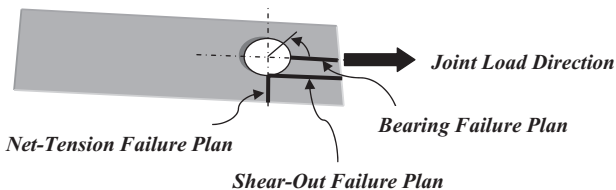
Failure plans for a composite bolted joint.
